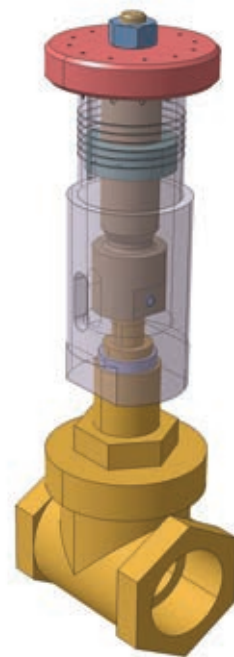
CAD design of sub-assembly for control of position of valve stem. The sub-assembly has been applied for an adjustment of hydraulic resistance of equivalent grid/cap channels.
